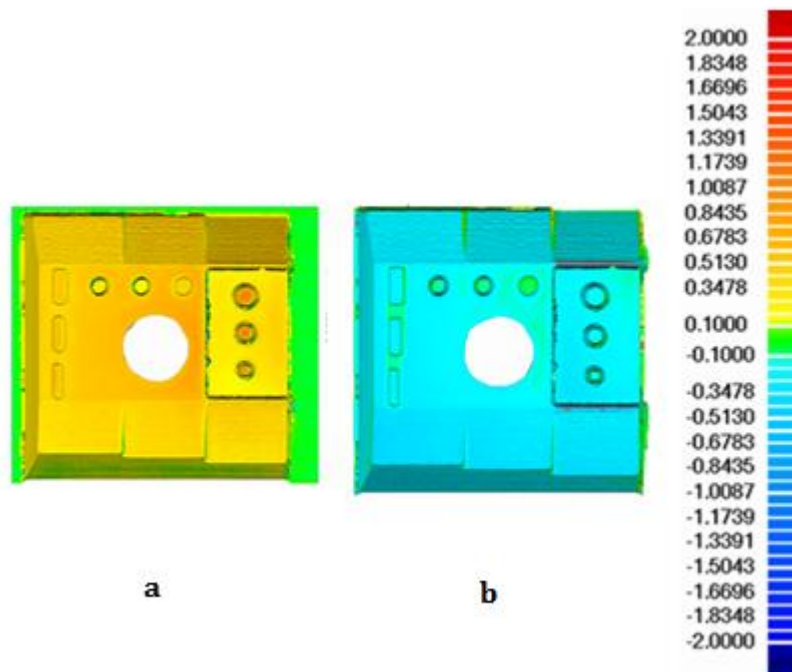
Touch probe scanned spray painted (a) and CNC machined (b) Alumide® test pieces
